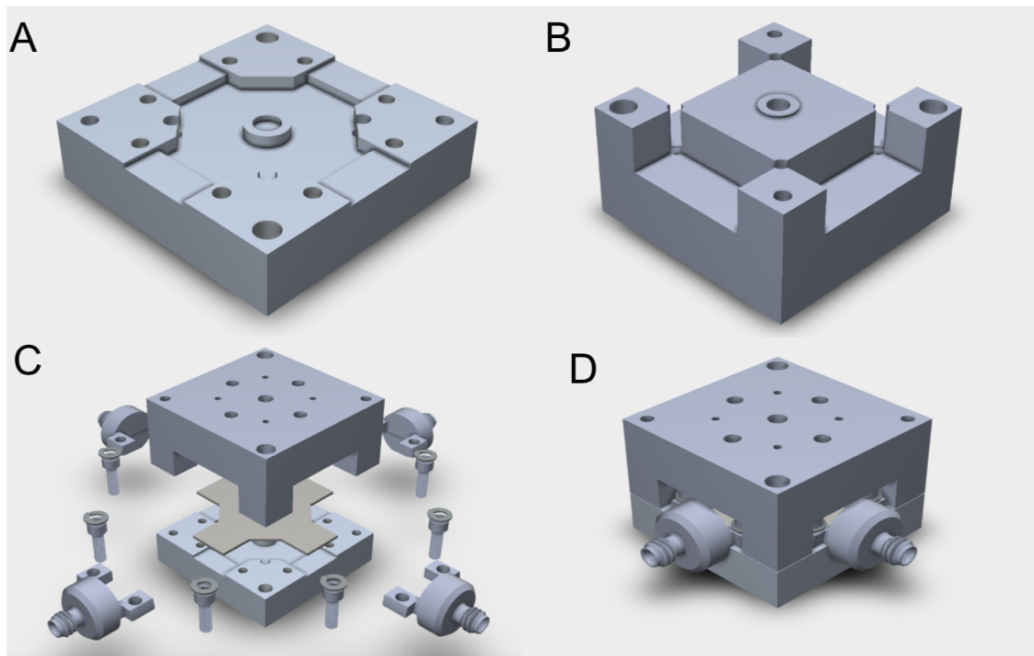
Solidworks models for: A) base of bracket and chip holder, B) lid of bracket, C) exploded view of entire assembly, D) complete assembly.
